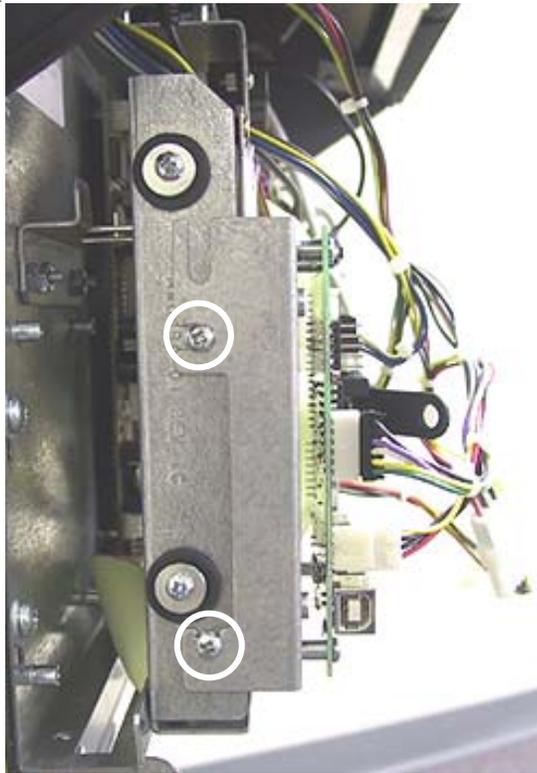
HARD DRIVE REMOVAL - LOCATION OF SCREWS SECURING I/O BOARD MOUNTING PLATE TO HARD DRIVE MOUNTING PLATE
